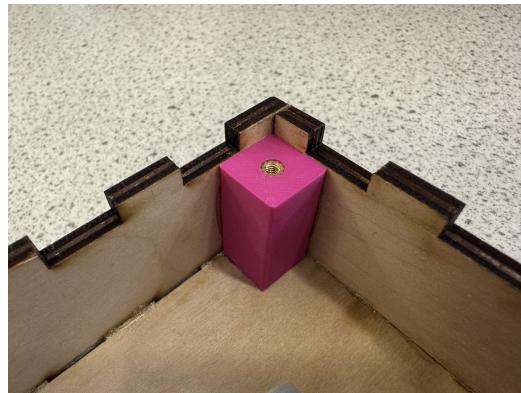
Screw attachment points, glued in with the brass threaded inserts.
